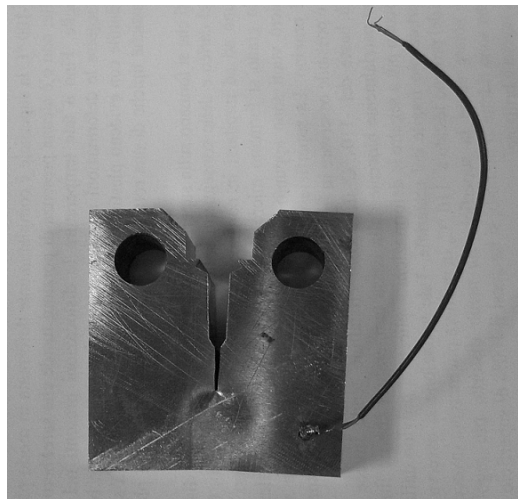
welded thermocouple wire inside the hole.
